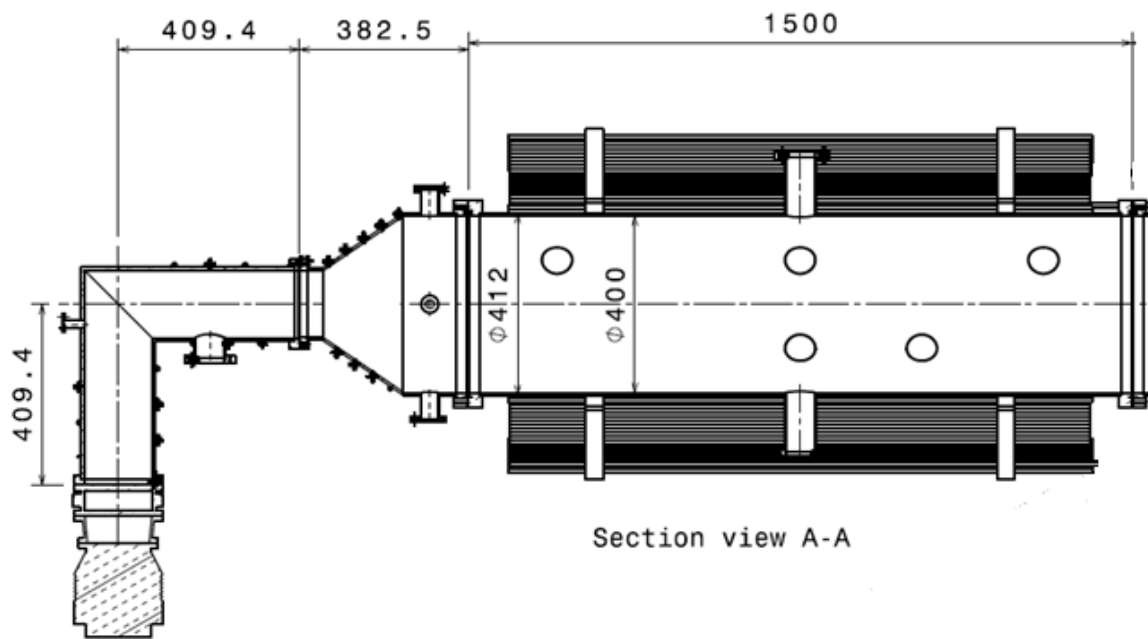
Sectional view of experimental setup. All dimensions in mm.
